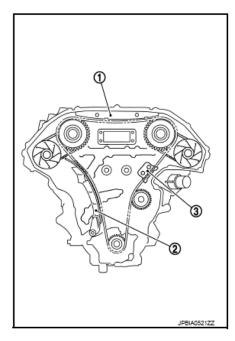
Identifying Internal Chain Guide, Slack Guide And Tension Guide Courtesy of NISSAN NORTH AMERICA, INC.
